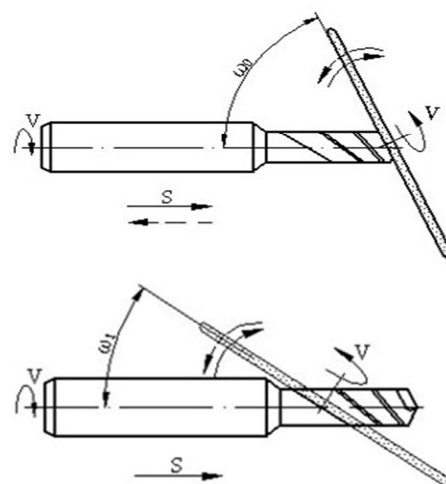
Schemes of change of orientation of axes of a spindle of preparation of a drill and grinding spindle. Method of turn of a grinding spindle.
